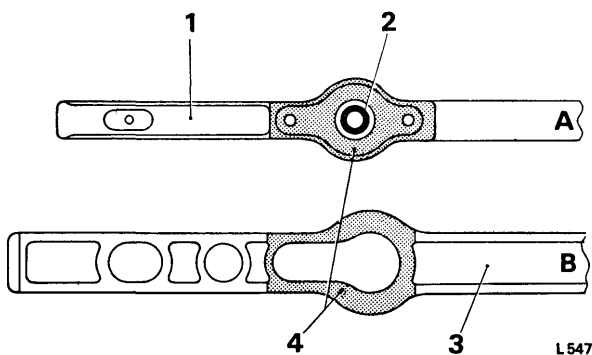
LOCATION OF SEALANT ON EXTERIOR DOOR HANDLE AND MOULDING (4-Door Saloon and Long Wheelbase Cars)
